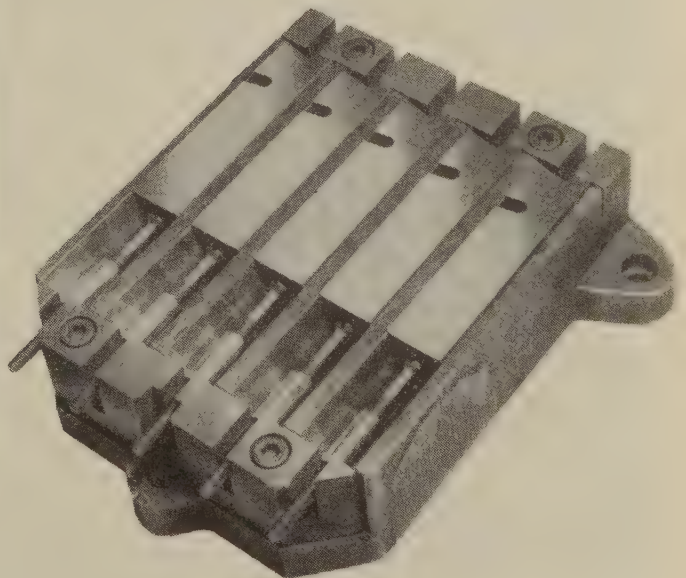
The fixture at right is one of the four shown in the machine, above. The fixture holds the knife edges in slots while one face is lapped to a 60° angle to the other faces.
